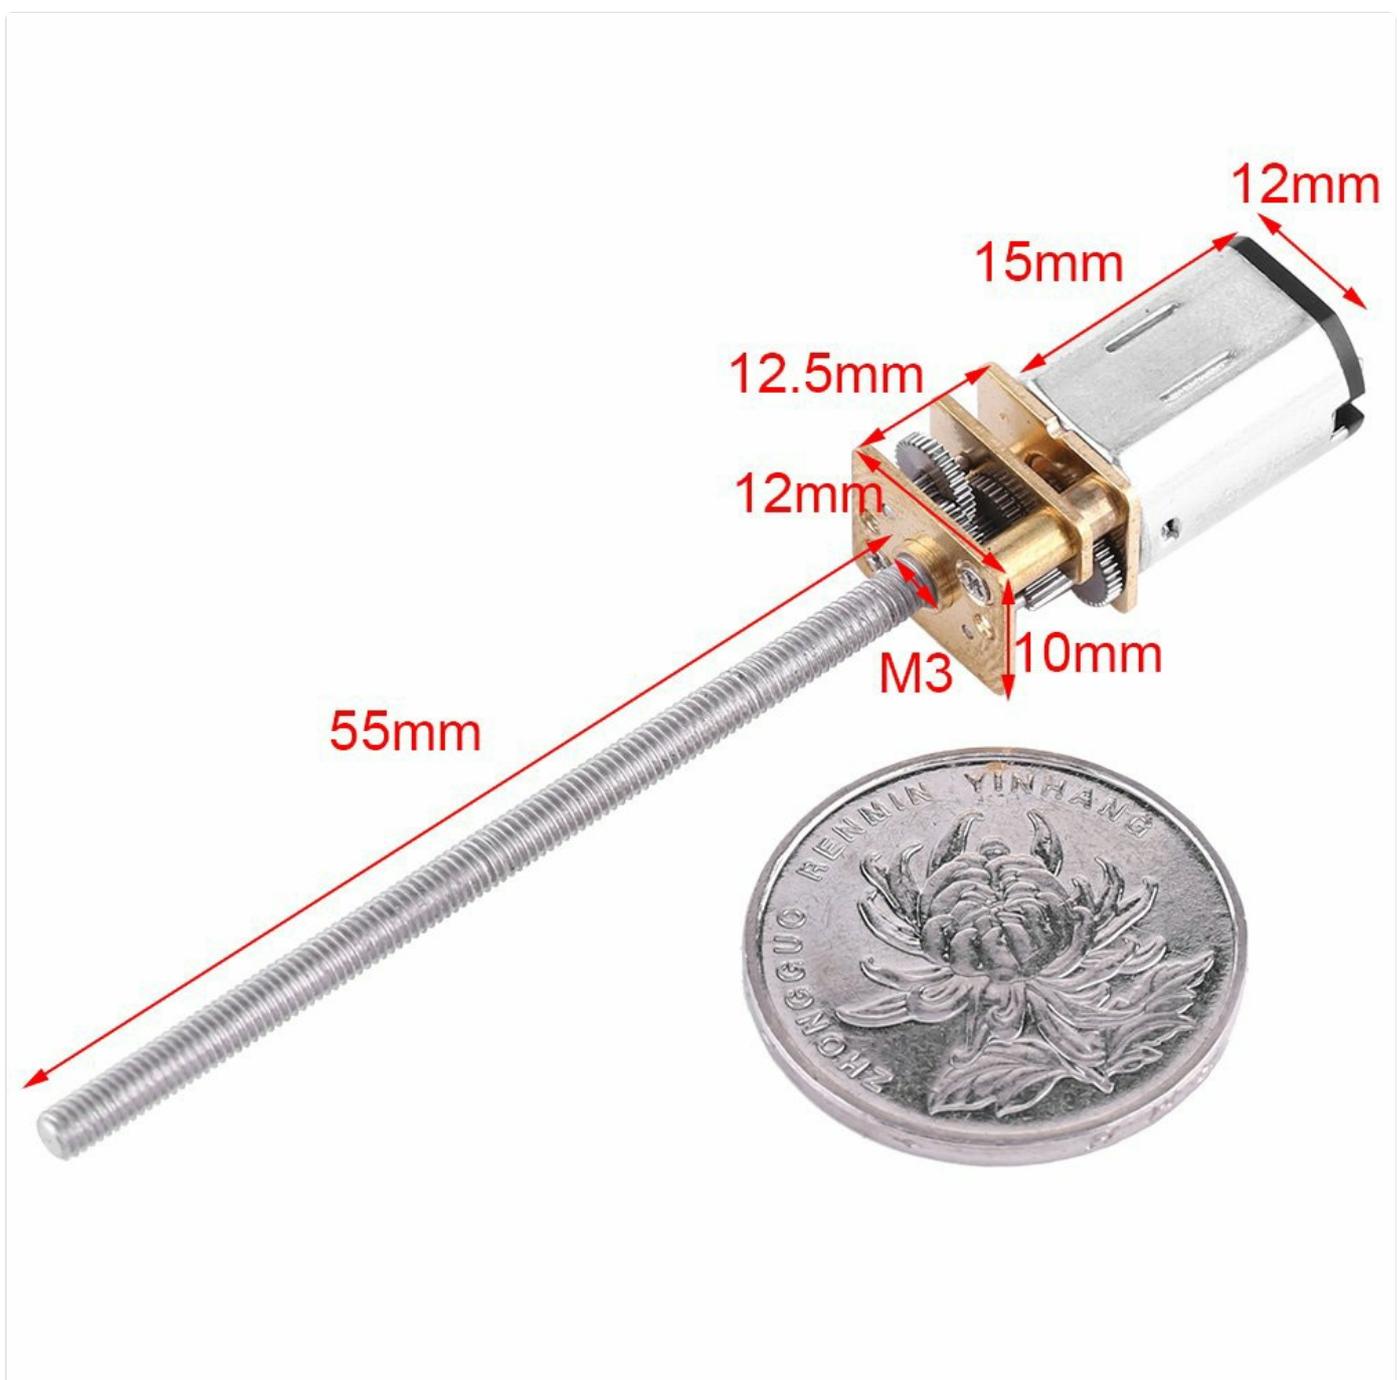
Dimensions of the gear motor, showing the 55mm shaft length and M3 diameter, alongside a coin for size comparison.
